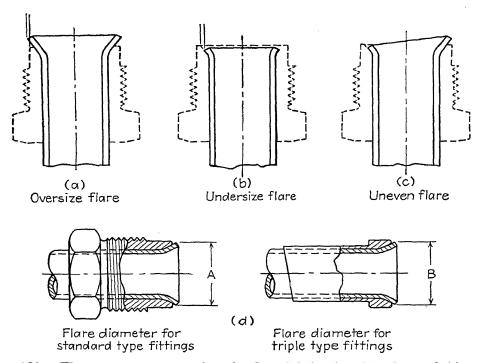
Three common errors in tube-flare fabrication (a), (b), and (c); and (d) correct tube flares. (Courtesy of Parker Appliance Co.)
